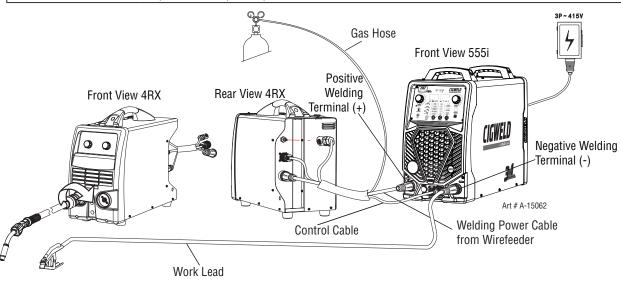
Setup for MIG (GMAW) Welding with Gas Shielded Mig Wire
